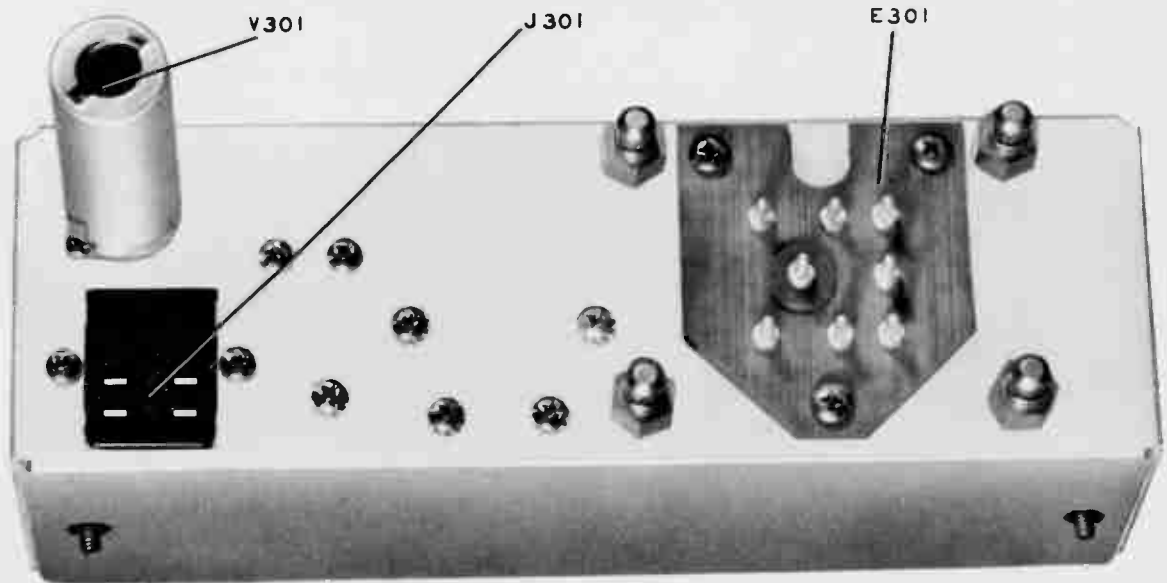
D.C. Power Supply - Parts Arrangement - Top View.
